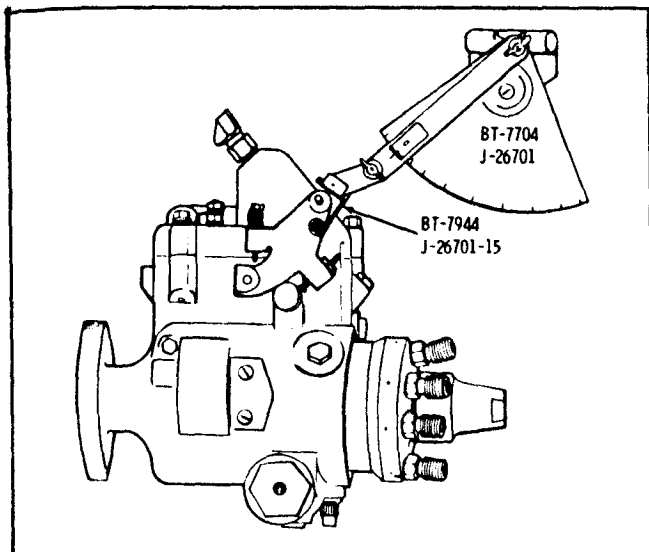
C5-8 Vacuum Regulator Valve Adjustment
